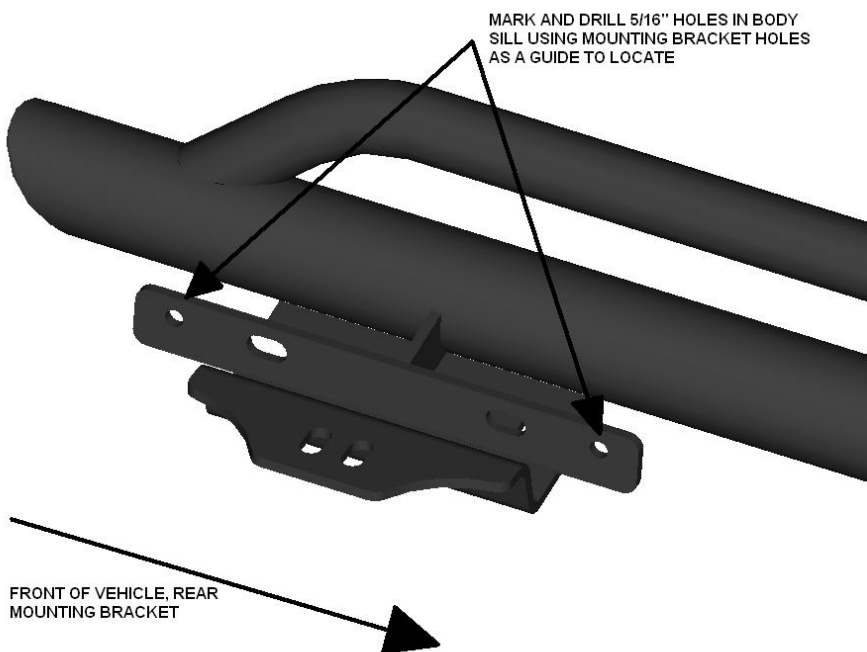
Location of 5/16" holes to be drilled in body sill at rear mounting location
